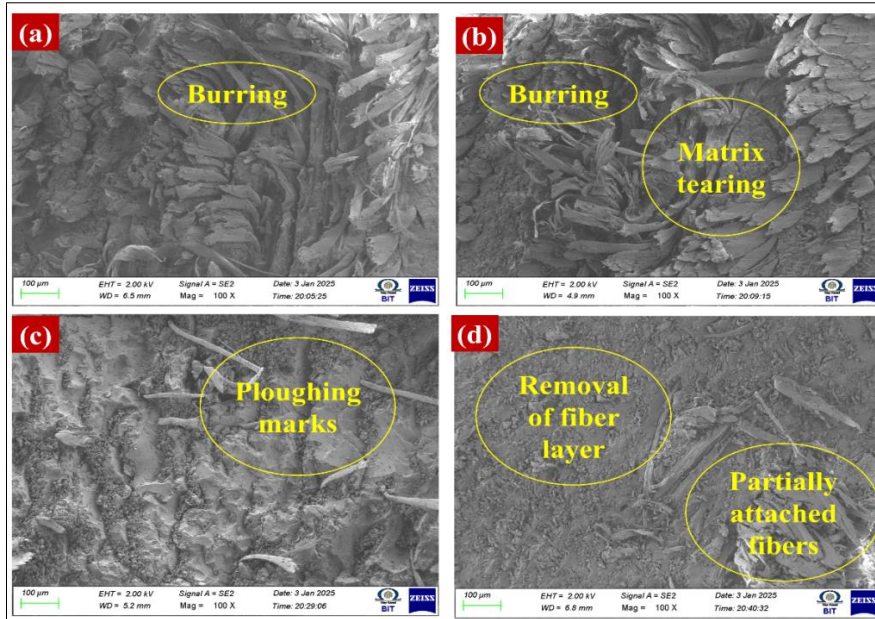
FESEM images of the machined surface of FFRE composites milled under the test conditions: (a, b) feed rate of 110 mm/min, end mill cutter size of 6 mm, spindle speed of 900 rpm; (c, d) feed rate of 110 mm/min, end mill cutter size of 10 mm and spindle speed of 900 rpm
